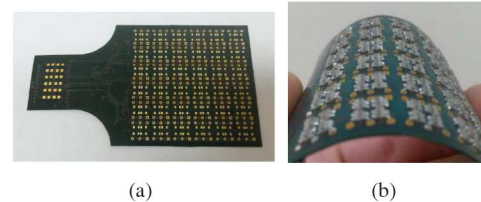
Pictures of the realized flexible PCB before (left) and after (right) the optoelectronic components mounting.
